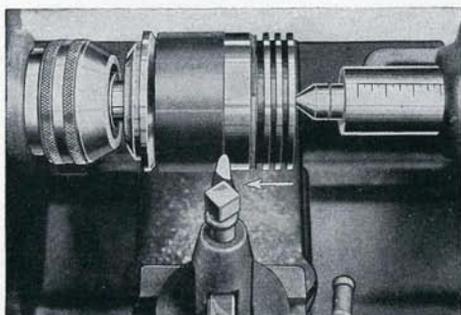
Turning a Semi-Machined Piston to Finished Diameter in the Lathe
